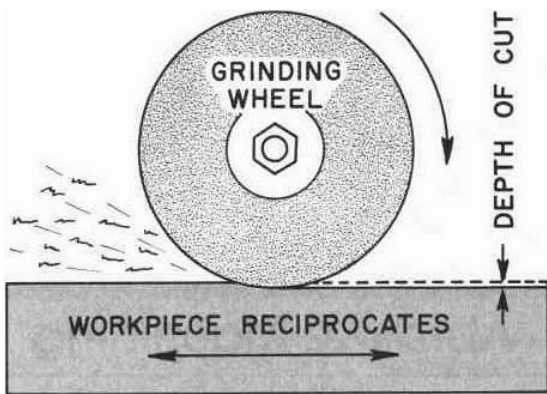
Relationship of grinding wheel and work-piece with horizontal-spindle surface grinder.
